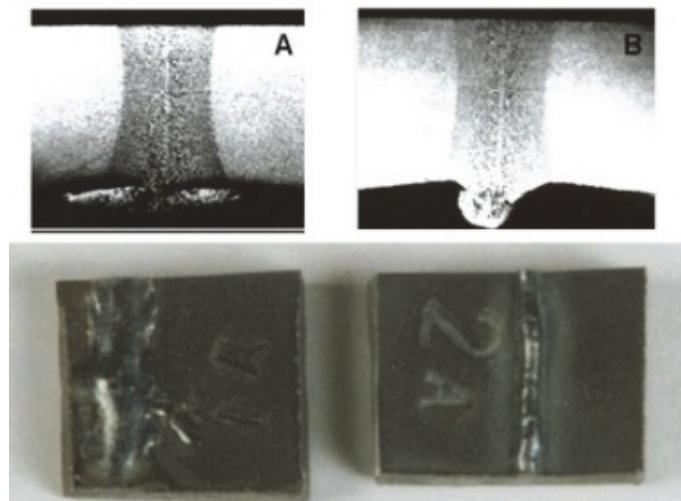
Weld size before and after optimization of welding parameters [12]
